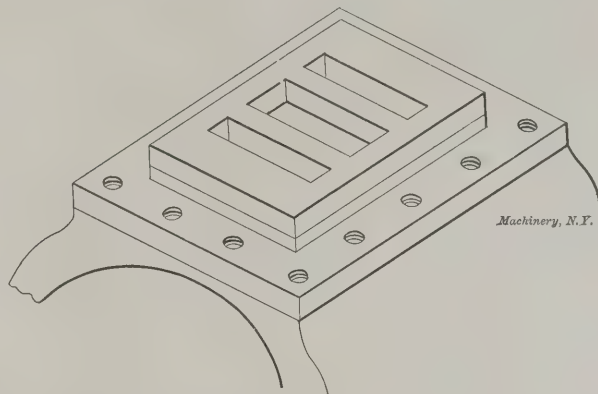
False Valve Seat for Locomotive Slide Valves.
